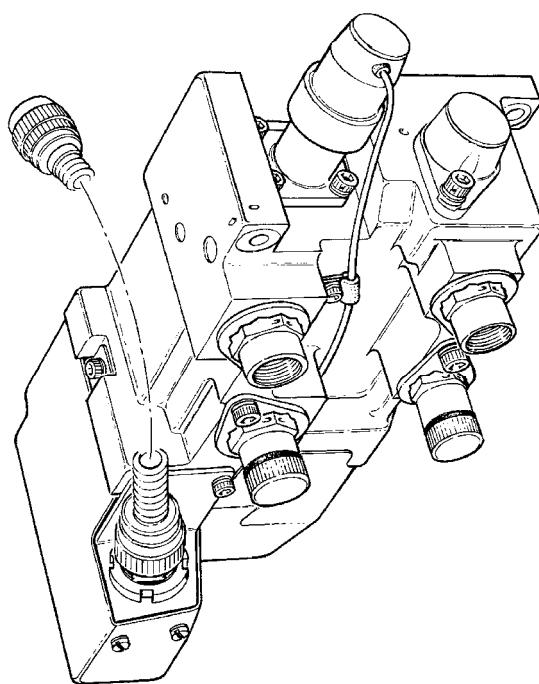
TORNADO SPOILER ACTUATOR AND VALVE PACKAGE
